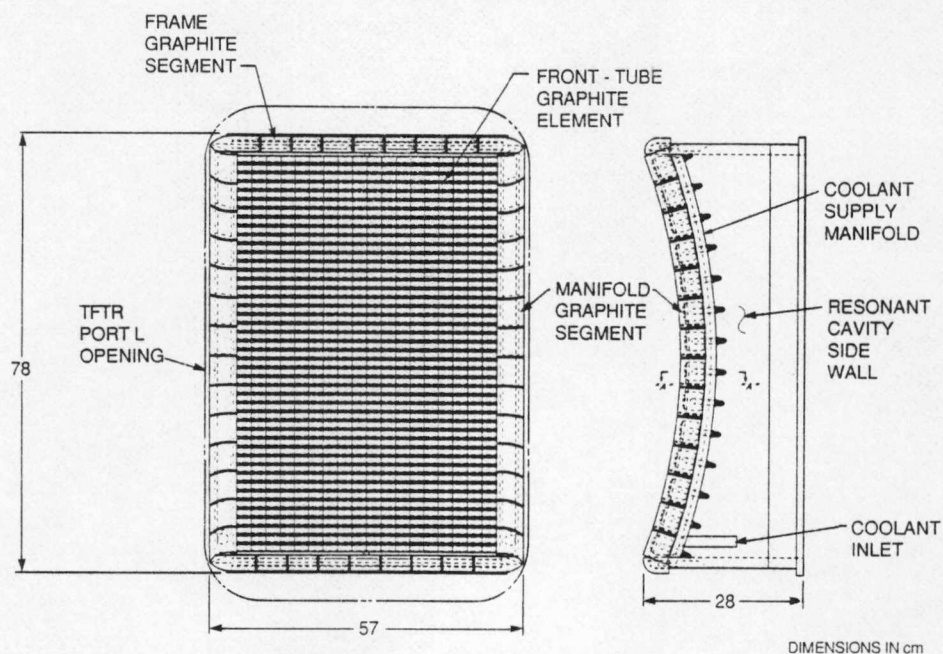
ORNL RDL antenna Faraday shield subassembly.
